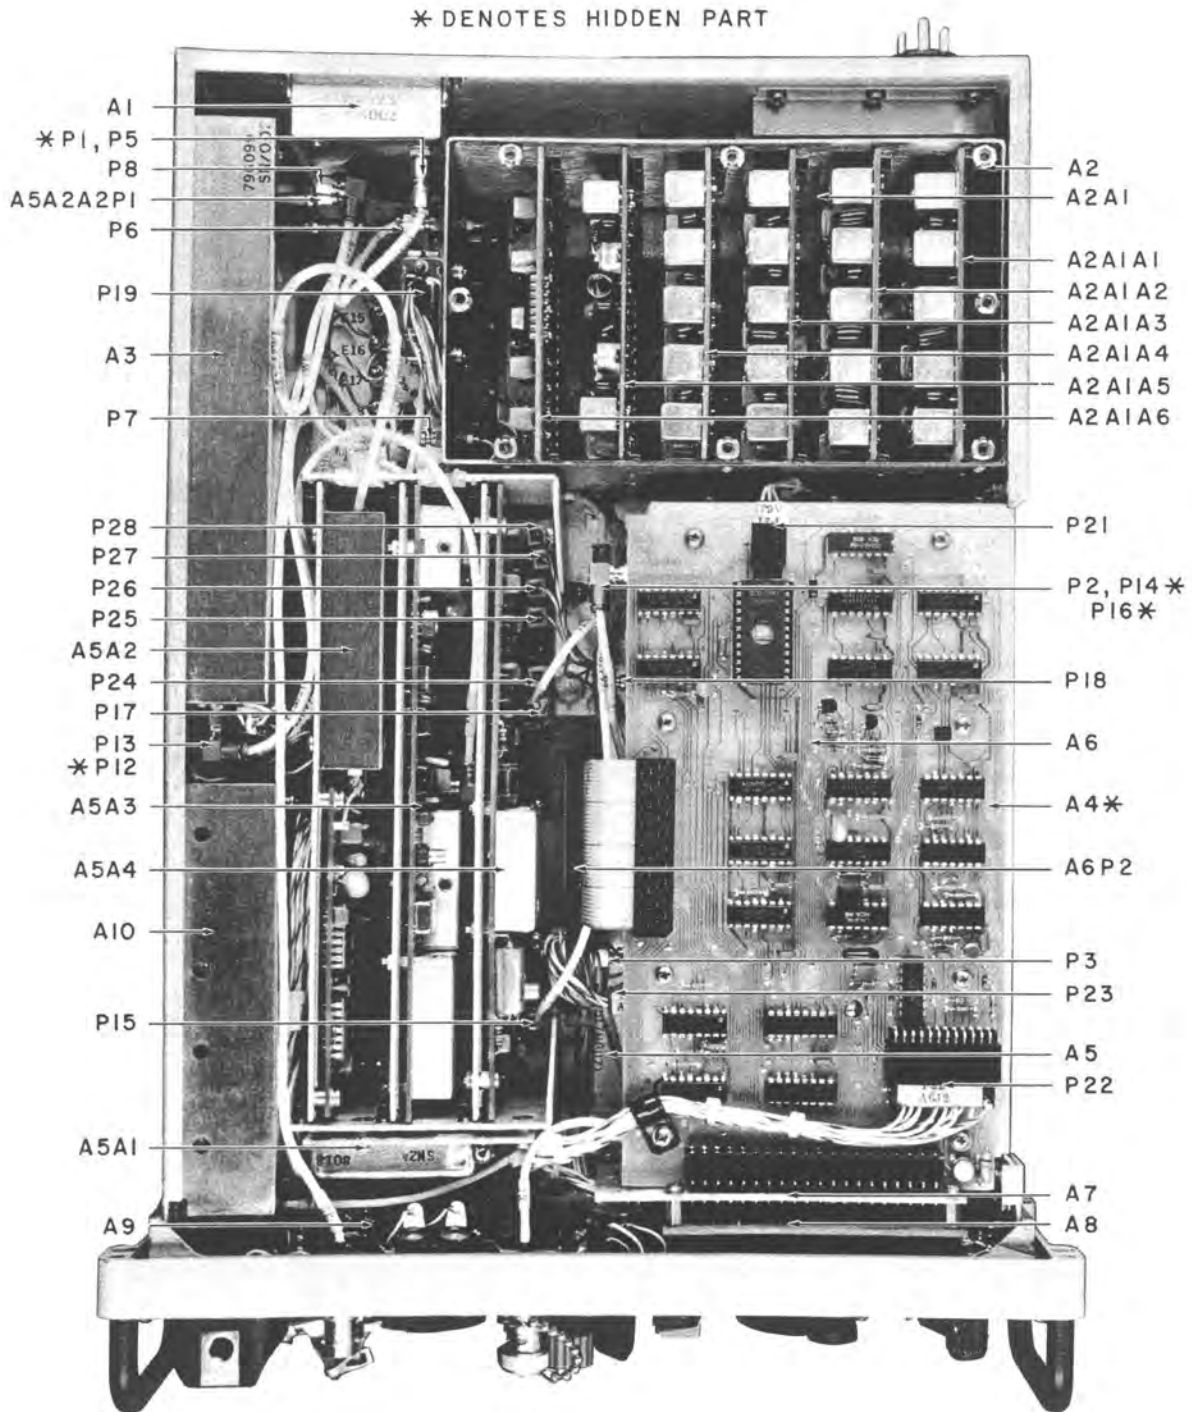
WJ-8770 HF Receiver, Top View,
